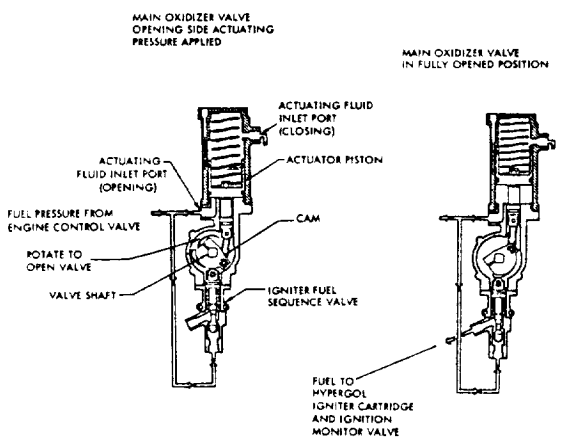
Mechanically linked arrangement between the main oxidizer valve and the igniter fuel sequence valve of the A-1 stage engine.
